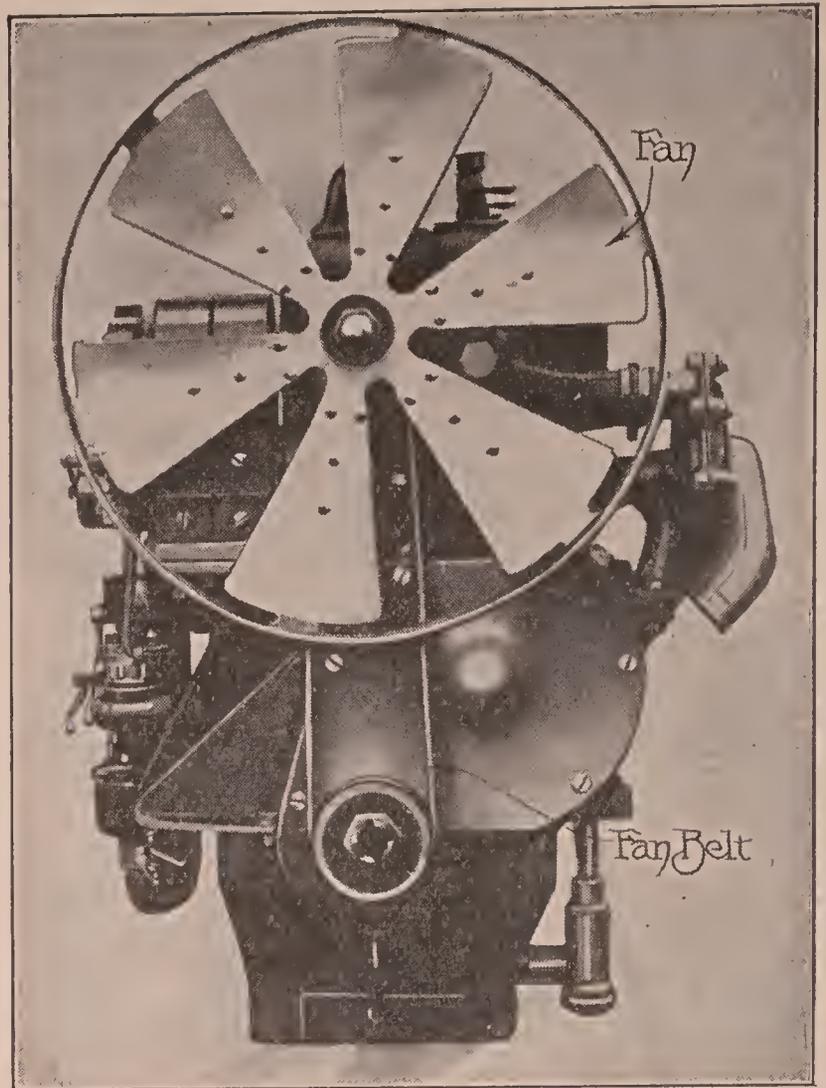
A Typical American Fan Layout, with Six Blades and Flat Belt.
